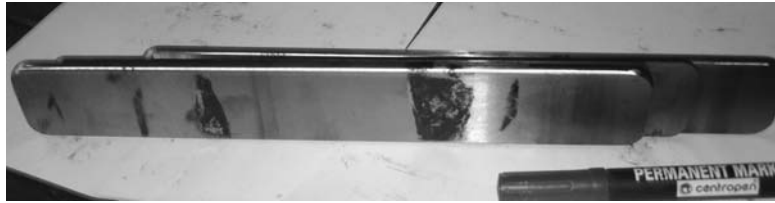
Photograph of the damaged plate of the TWC caused by the fretting corrosion and misalignment of the HPR - LMPR
